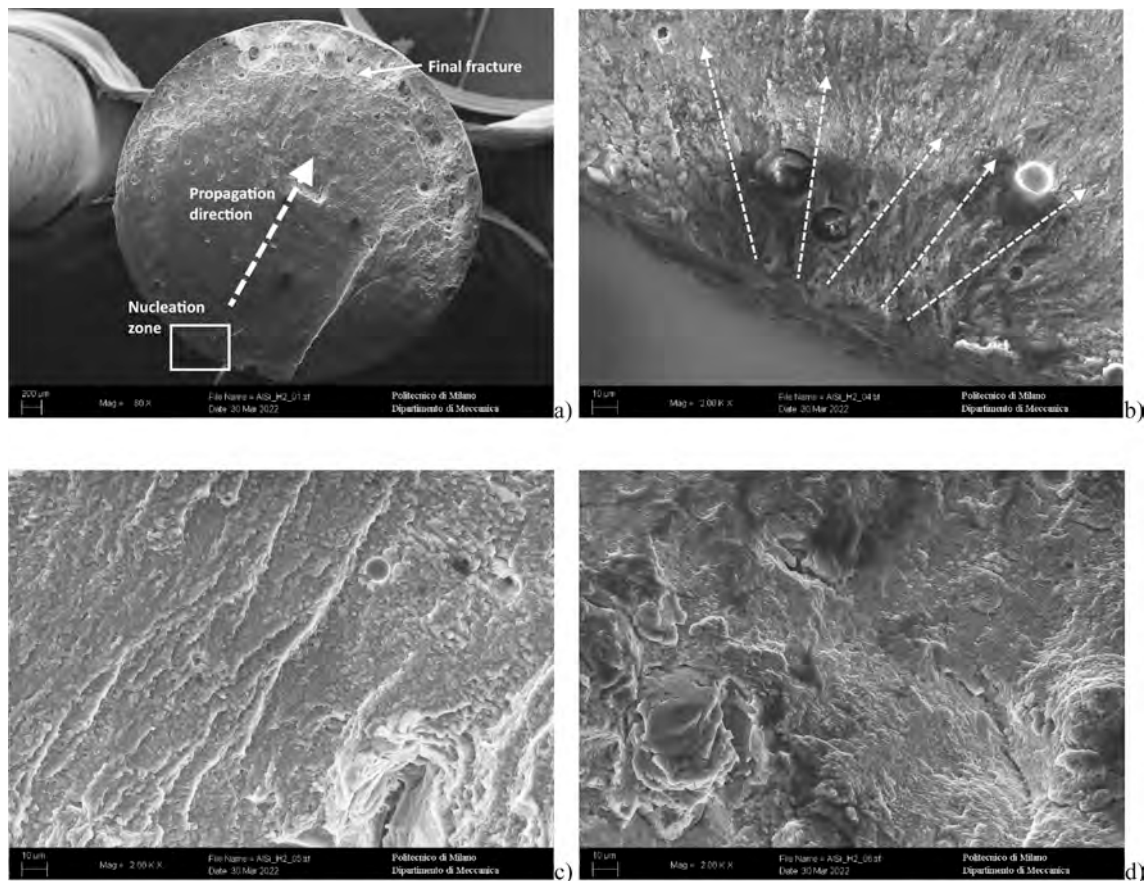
Fracture surface analysis of specimen HCF2 - (a) fracture surface, (b) nucleation zone, (c) propagation zone, (d) final fracture. Macro- and micro-porosity is clearly visible.
